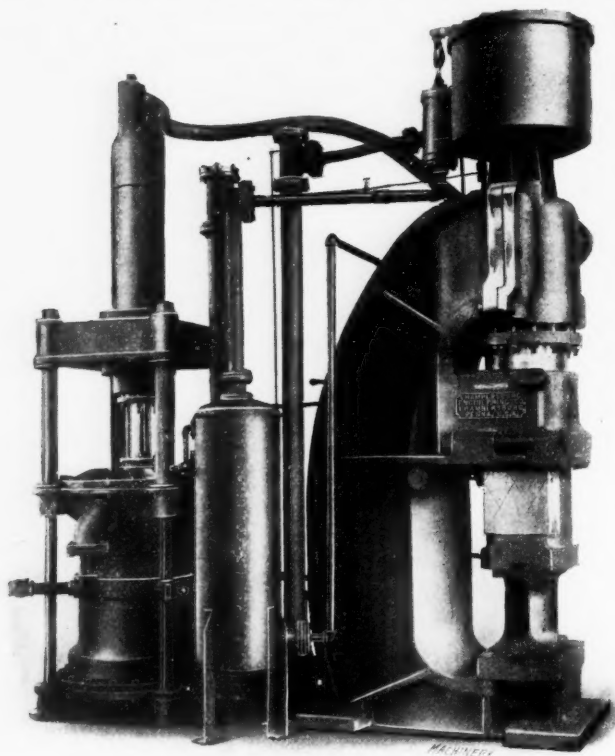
Opposite Side of Steam-hydraulic Forging Press
